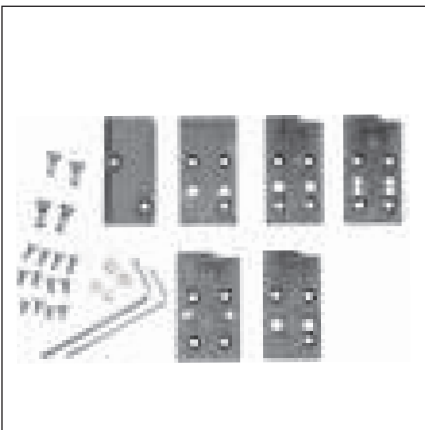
AOR interface plates, cover plate and included mounting hardware
